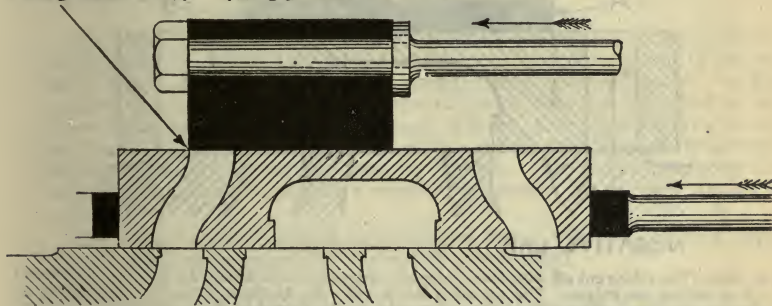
Riding valve in cut off position. To locate eccentric for any desired cut off, turn engine over till piston is at the desired point of cut off, then turn riding eccentric in the direction of motion till riding valve is in cut off position as shown.
